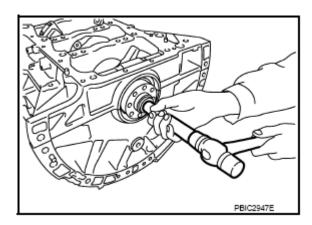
Pressing Pilot Converter Into Cylinder Block Courtesy of NISSAN MOTOR CO., U.S.A.
